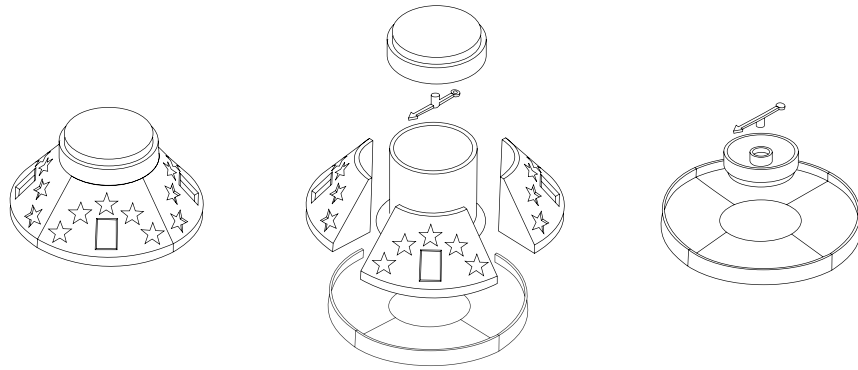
Illustration of the packaging when assembled (left) and its components disassembled (middle) and order of components to assemble the Principle Wheel (right).
